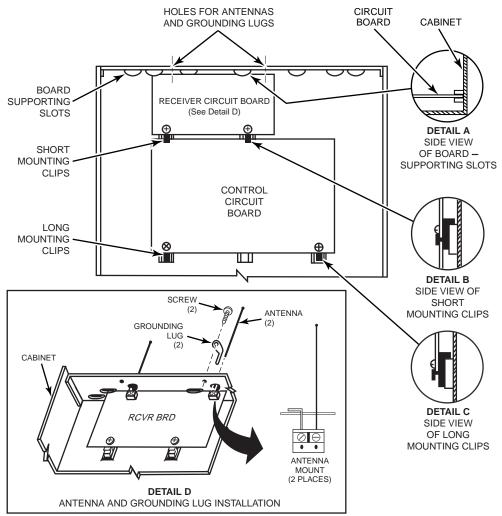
Mounting the PC Board and RF Receiver Together in the Cabinet
